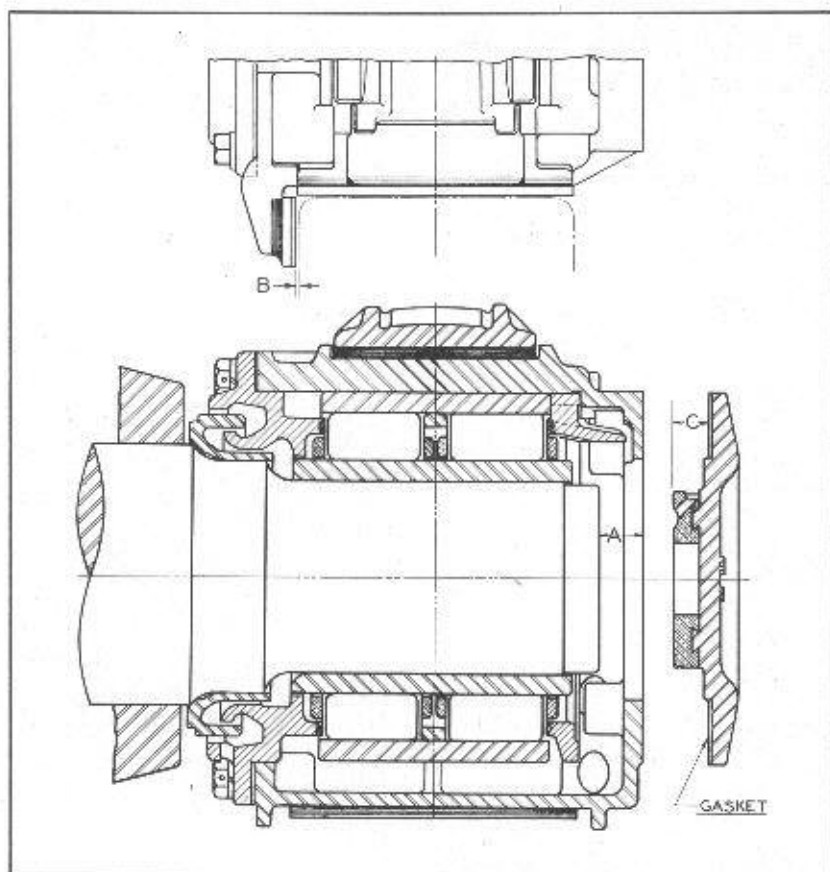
Method for checking the lateral clearance between the axle end and the thrust block.
